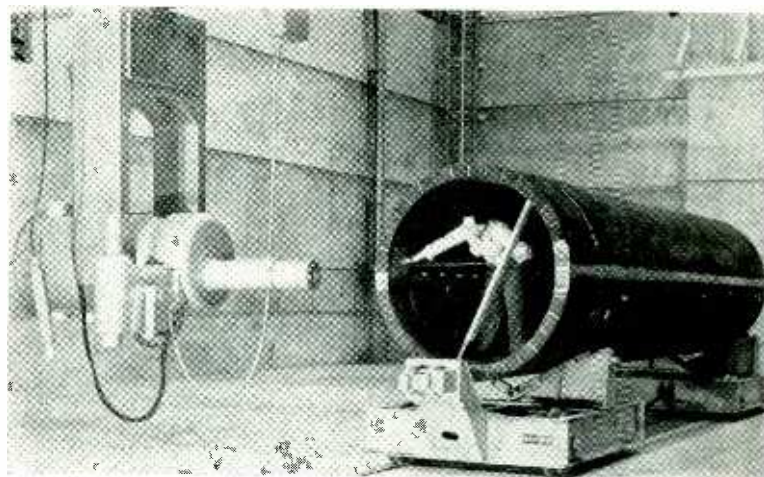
This giant particle accelerator built by the High Voltage Engineering Corp. is used for x-ray radiography of heavy casting.
